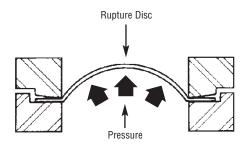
Forward-acting flat seat arrangement (insert bolted-type holder)
